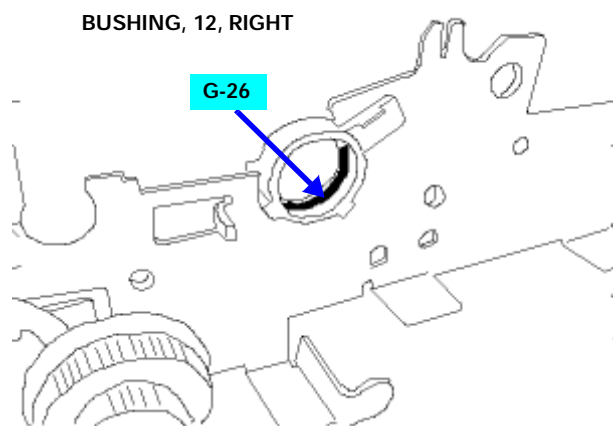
#6 Inside the PF Roller Bushing - Right
